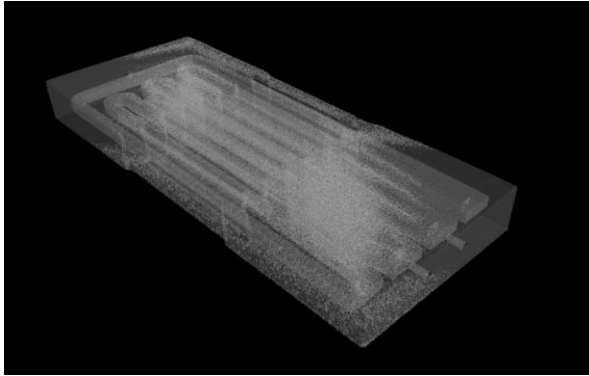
Inspection of Powder stuck inside the LHP using Phoenix Vtomex S240 CT scan machine.
